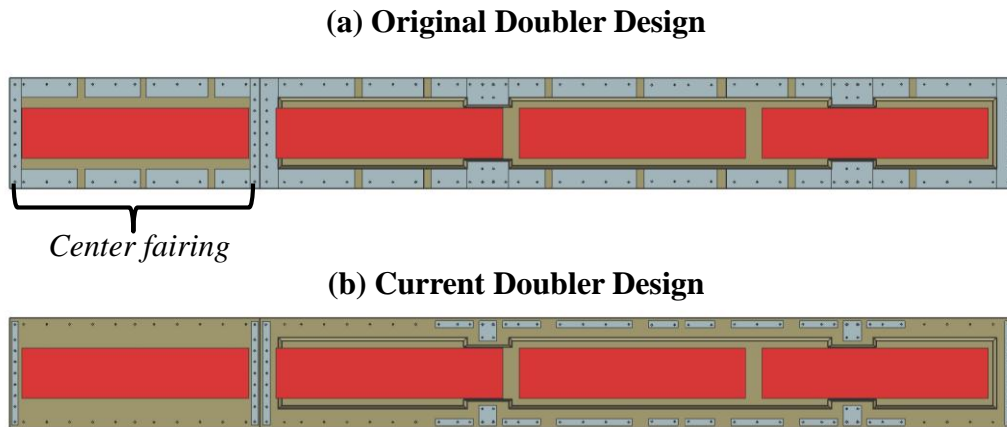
P-3 Inboard MCoRDS Fairing Doubler Design
